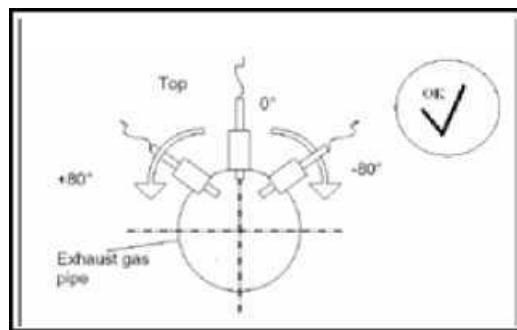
Illustration of the NO_x sensor and mounting angle
